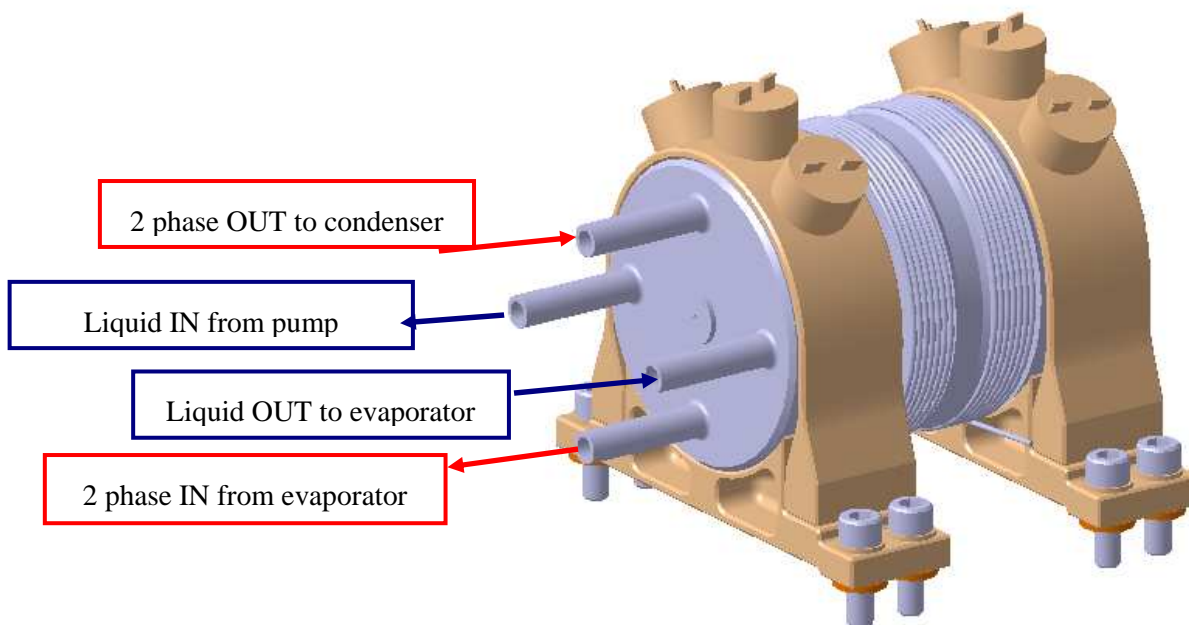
HX FM primary : orbital welding step (ref drawing: ET6029-04-DR-029-f-GE-ASM Heat exchanger welding and assemble)
